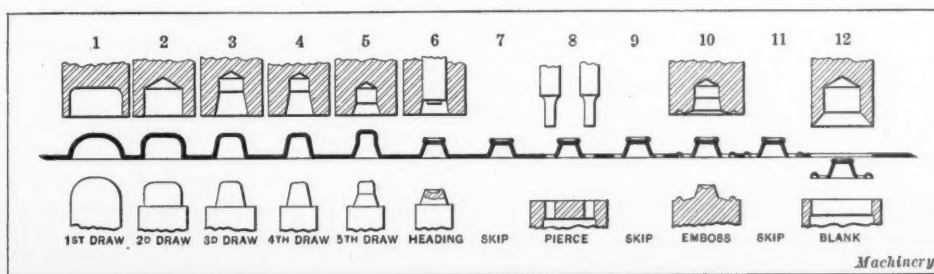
View of Upper and Lower Set of Tools and Strip, showing Progressive Steps in making Stud
